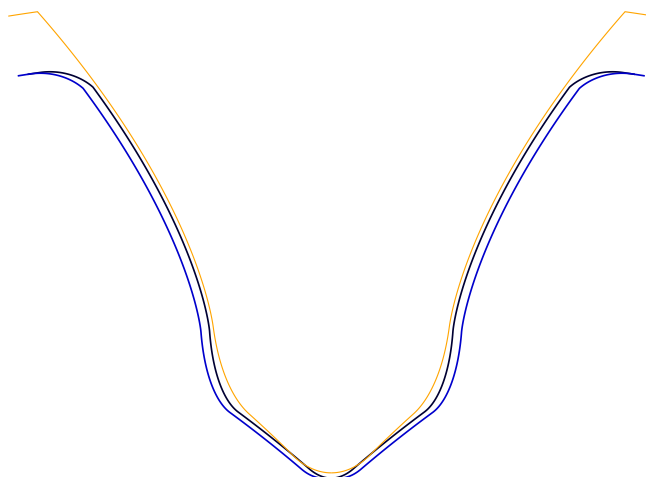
Manufacturing visualisation, showing finished cutter tooth space profile (blue), cutter profile with allowance on flanks (black) and the profile cut in the cutter blank by the selected manufacturing tool (yellow)
